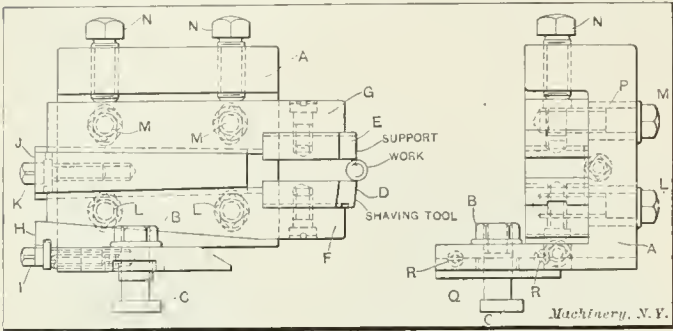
Shaving-tool Holder which can be used for a Wide Range of Work
